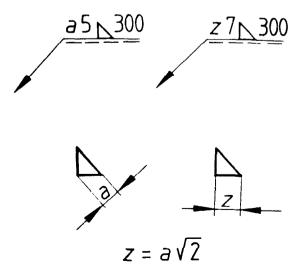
Methods of Indicating Dimensions for Fillet Welds
